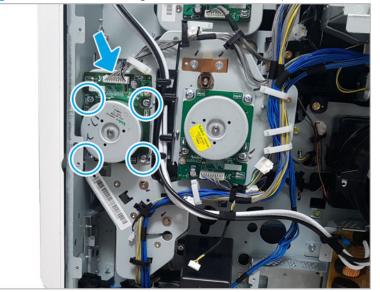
Remvoe the Registration & Feed & MP Tray 1 drive motor
